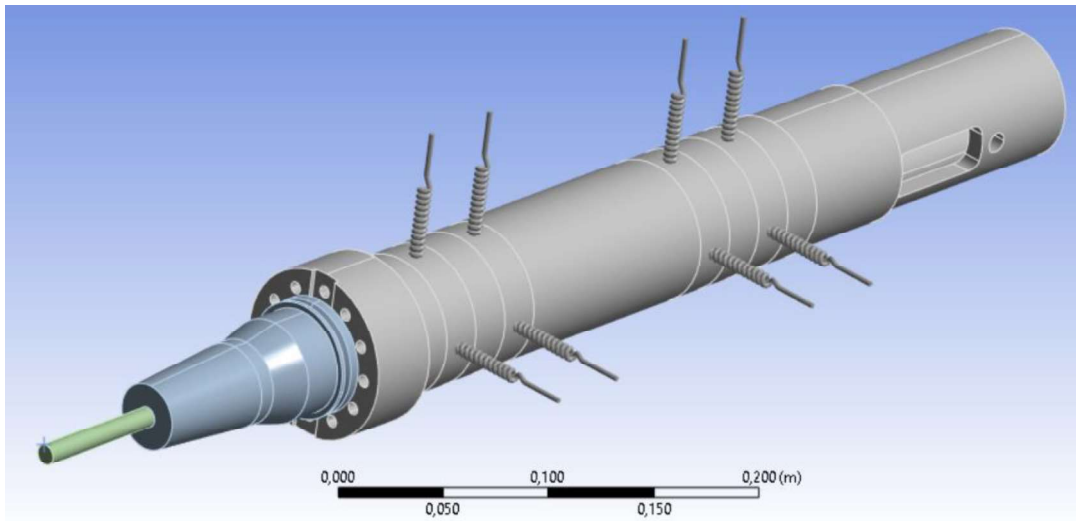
Finite Element Model of Spindle and holder with Slender Tool
